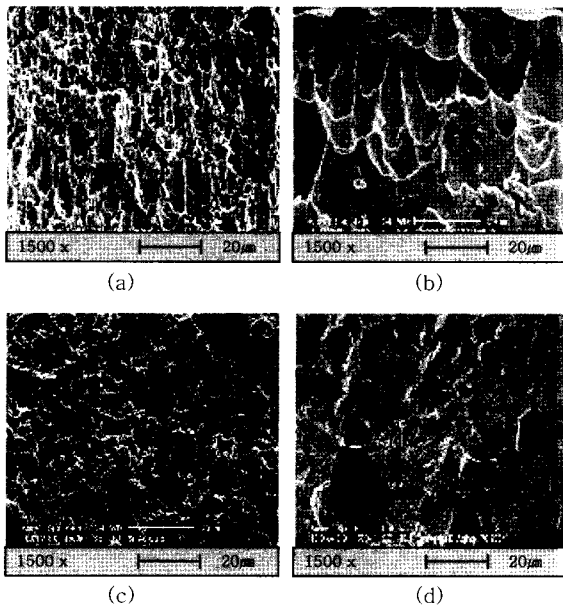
Fracture surface(solder side) of Sn-3.5Ag-0.75Cu(a:no aging, Hv:9, b:aging 170°C, 900h, Hv:12)and Sn-2.0Ag-0.5 Cu-2.0Bi(c:no aging, Hv:17, d:aging 170°C, 900h, Hv:20)
